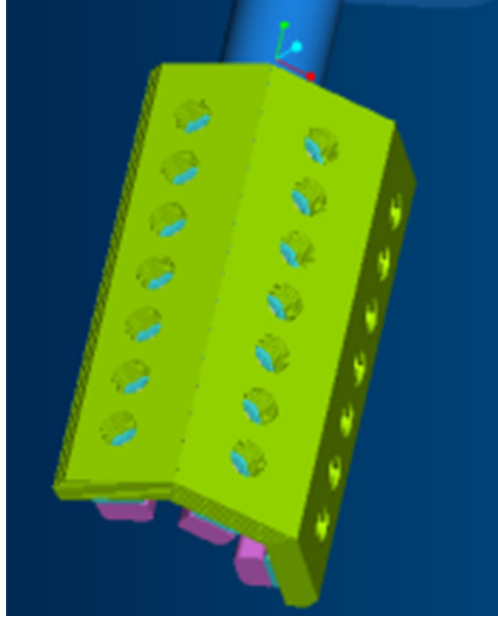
Picture of an older 3-Z LDI design with more injectors by Parker Hannifin.
